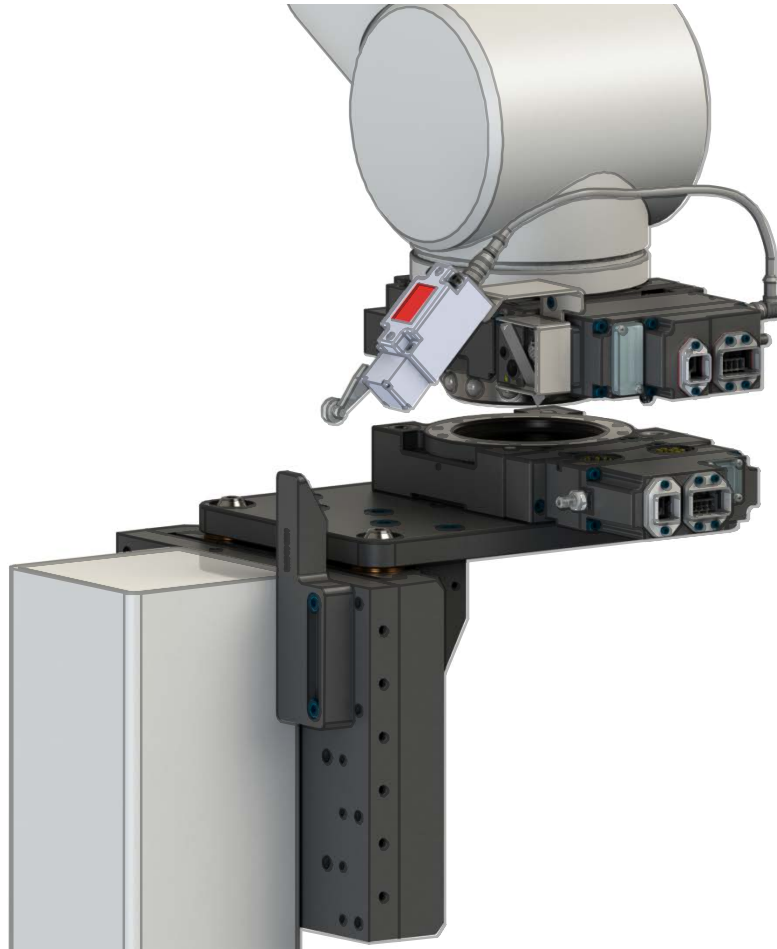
Safe Zone Map for a Tool Stand Hook and Hanger Module Configuration
